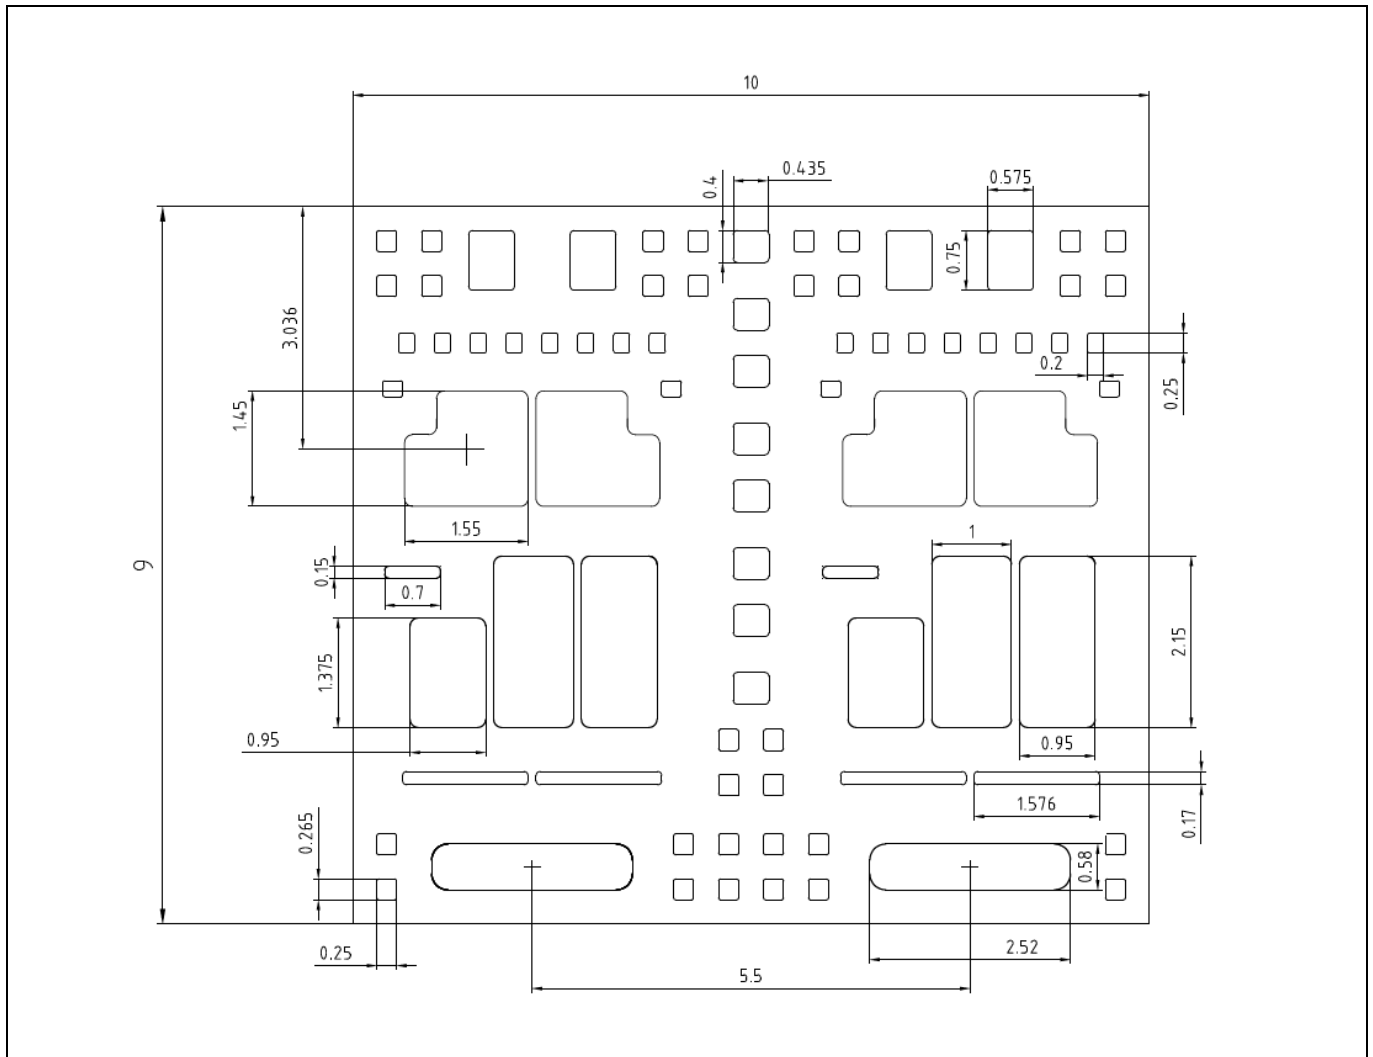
Stencil pad size and spacing (all dimensions in mm)
